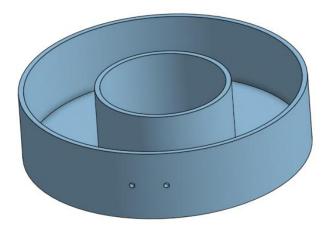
"Doughnut" to put outside PVC filled with magnetic copper wire wrapped inside to interact with super magnets inside PVC pipe
